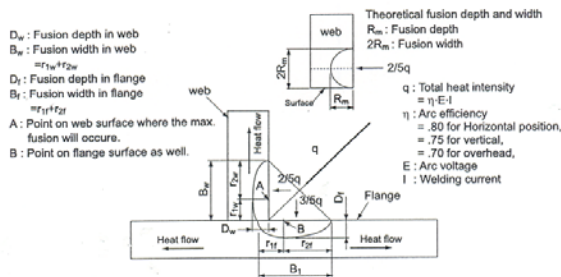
Conceptual model of heat flow and fusion in T-joint fillet welding
